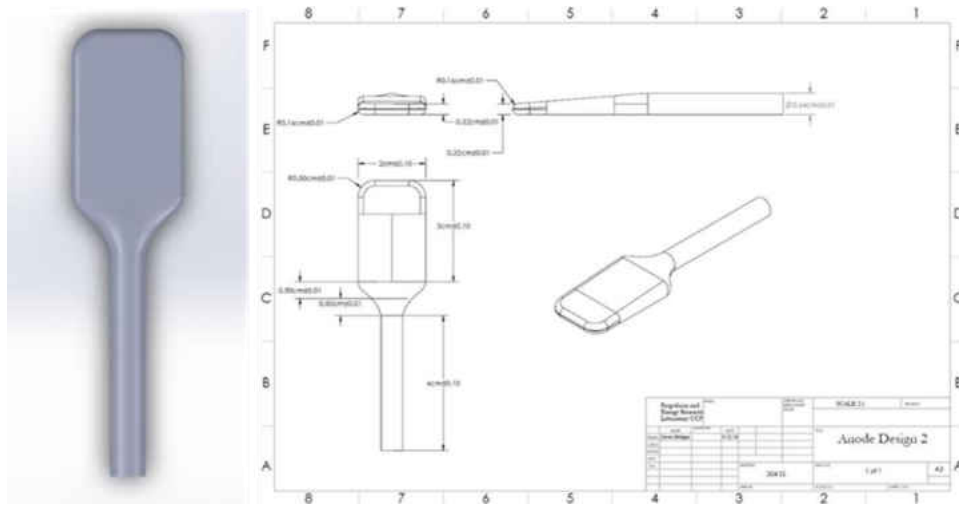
Final Electrode Design and Engineering Drawings for Manufacturing
